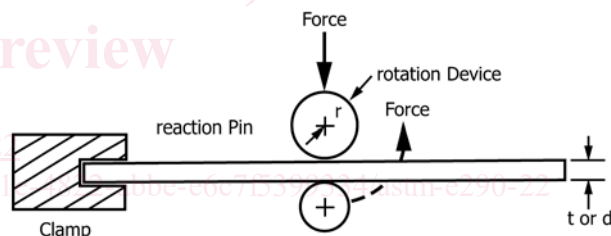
Schematic Fixture for Arrangement C, Mandrel-guided Semi-guided Bend Test
